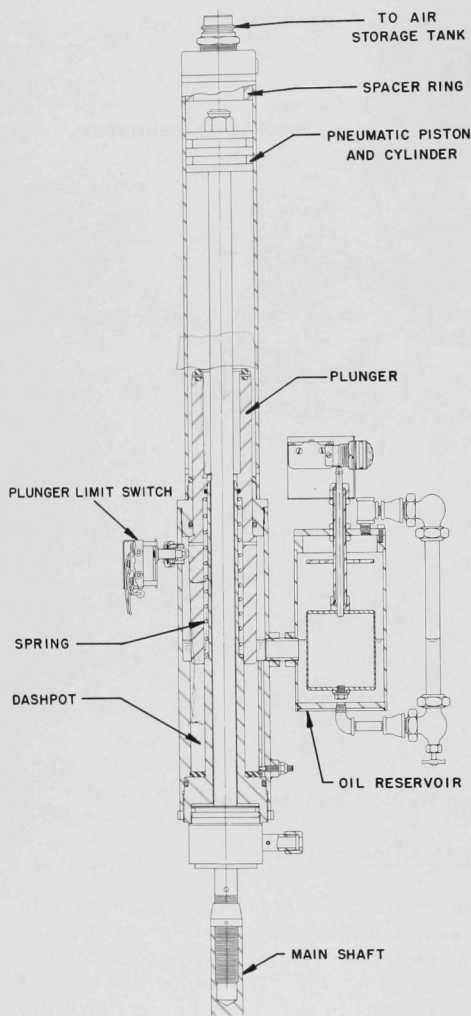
Pneumatic Piston and Hydraulic Shock Absorber Assembly
